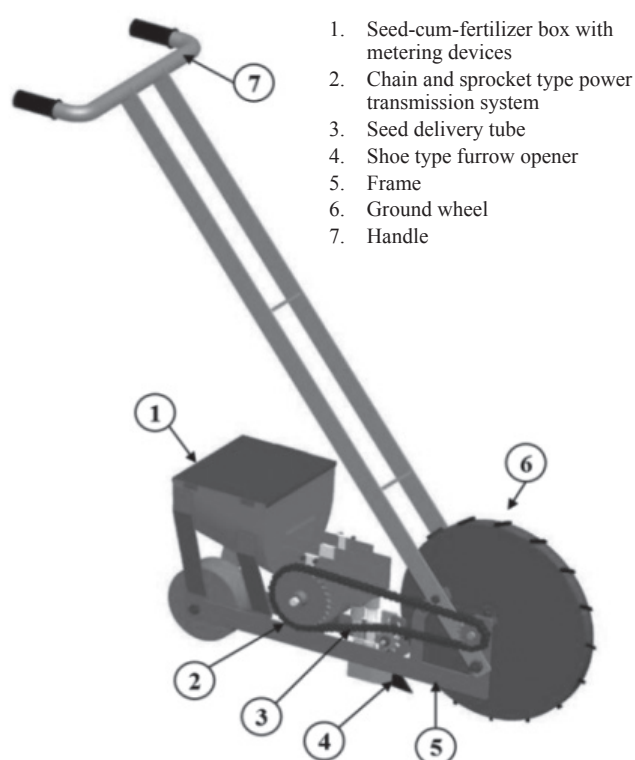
CAD drawings of manually operated single row planter cum fertilizer drill
